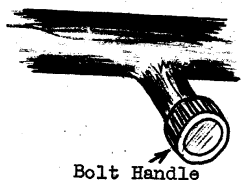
mm Semiautomatic Carbine Model SKS Bolt Assembly
